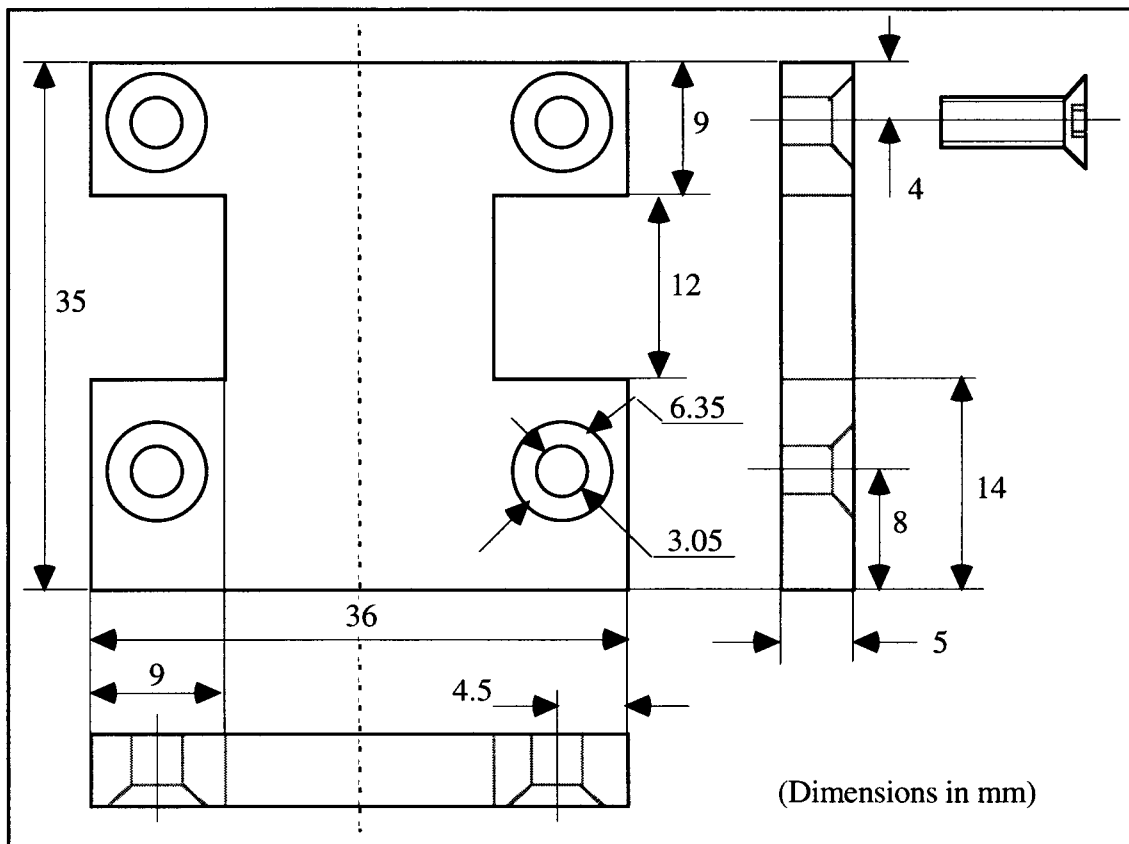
Jigs used to clamp the top and bottom ends of specimens
